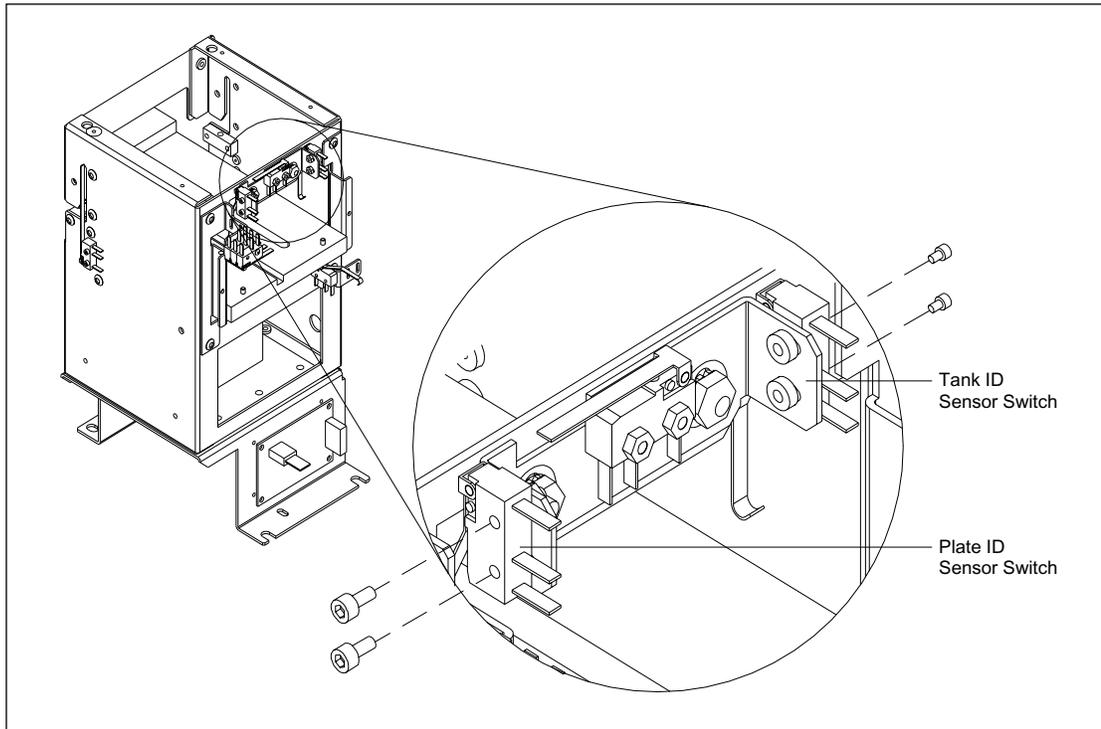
Cathode Plate and Tank ID Sensor Switches Mounting.
